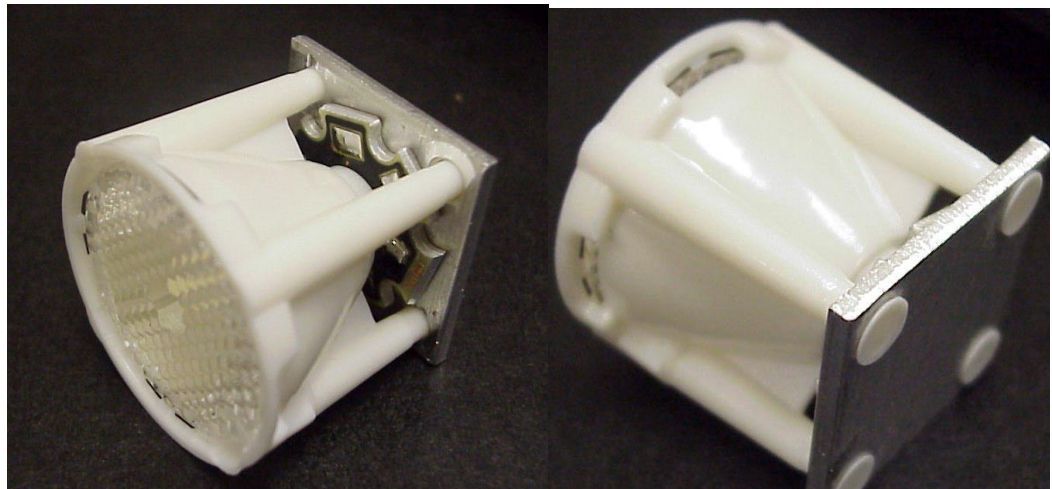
Heat-staked assembly of lens/lens holder to aluminum heat sink with Luxeon Star LED sandwiched between.
